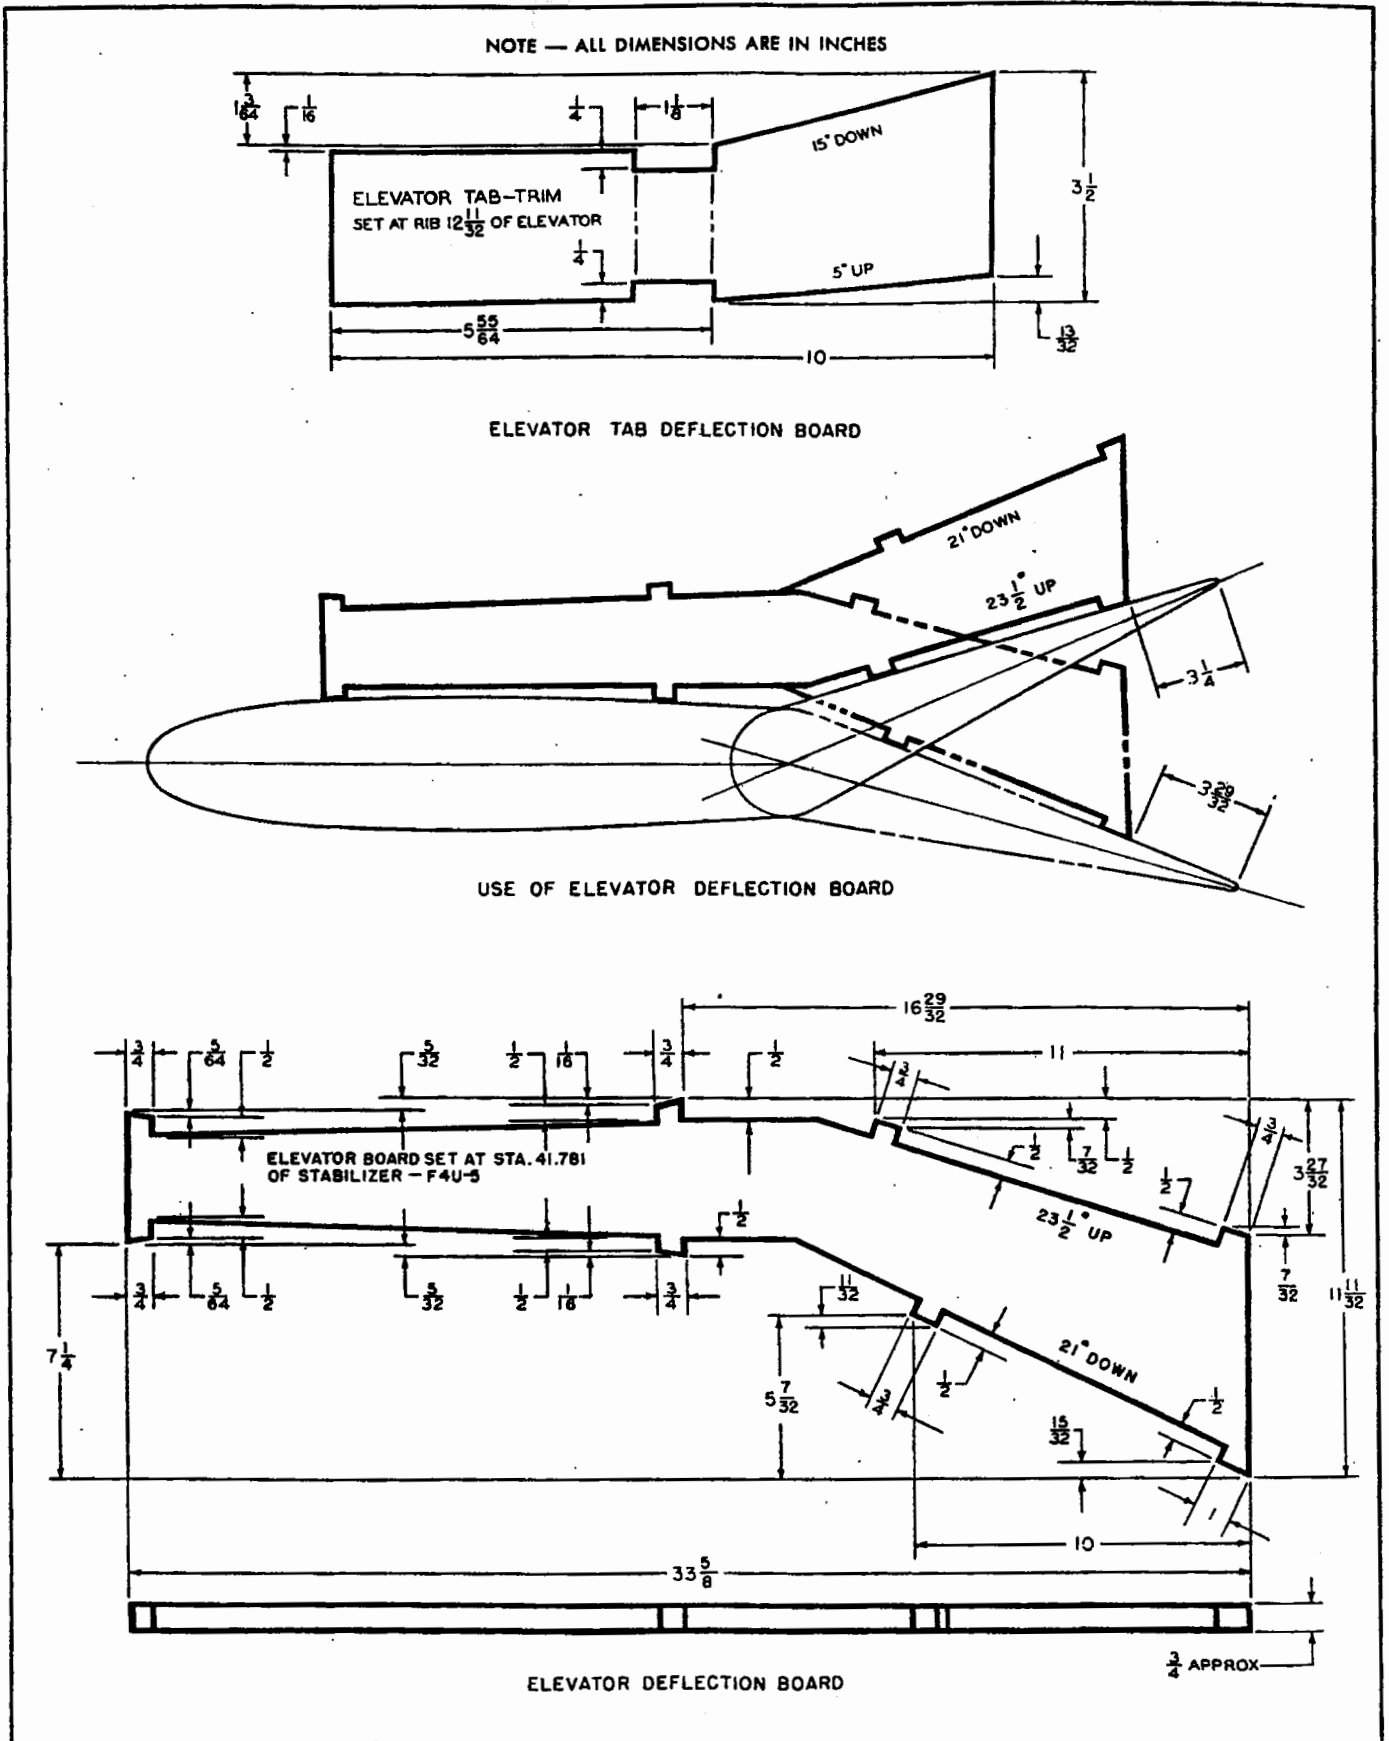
Elevator and Elevator Tab Travel Checking Boards.
